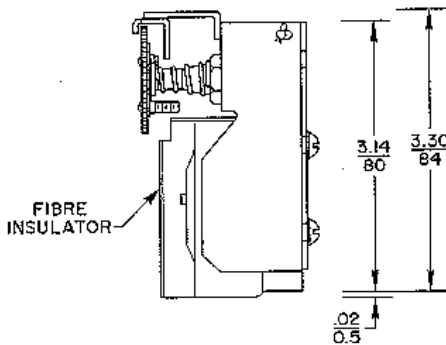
(right) — Clip-on terminal insulator, optional at extra cost on models specifying adjustments shown in Figs. 3, 4 and 5, but without center support mounting (Fig. 7).
